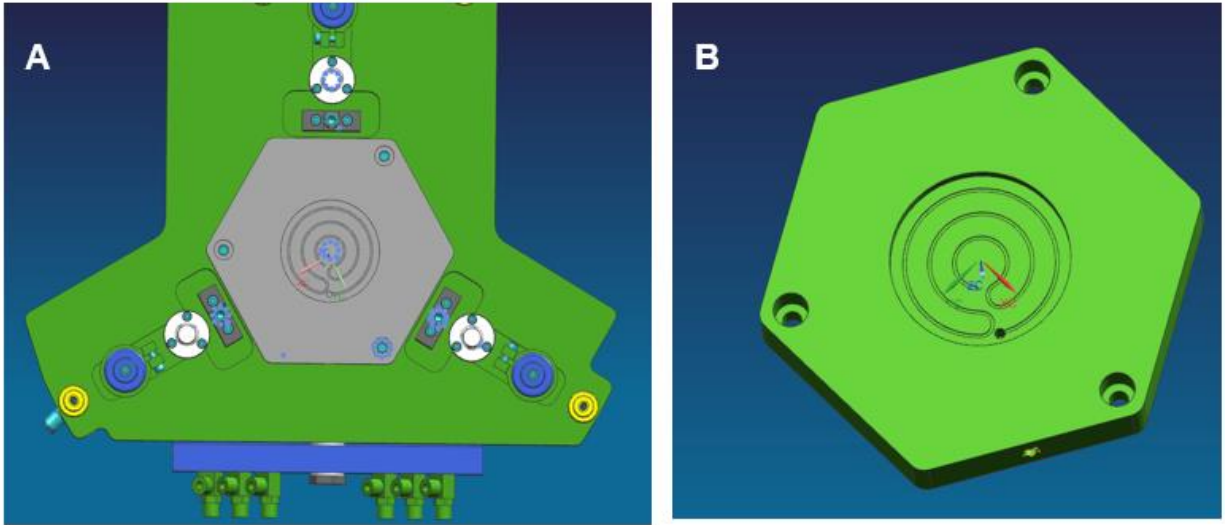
A: Wafer chuck (grey) mounted on the bottom part of the Bruker UMT (green), B: Wafer vacuum chuck with a 2-inch hole where the DLC/SiC wafers were mounted.
